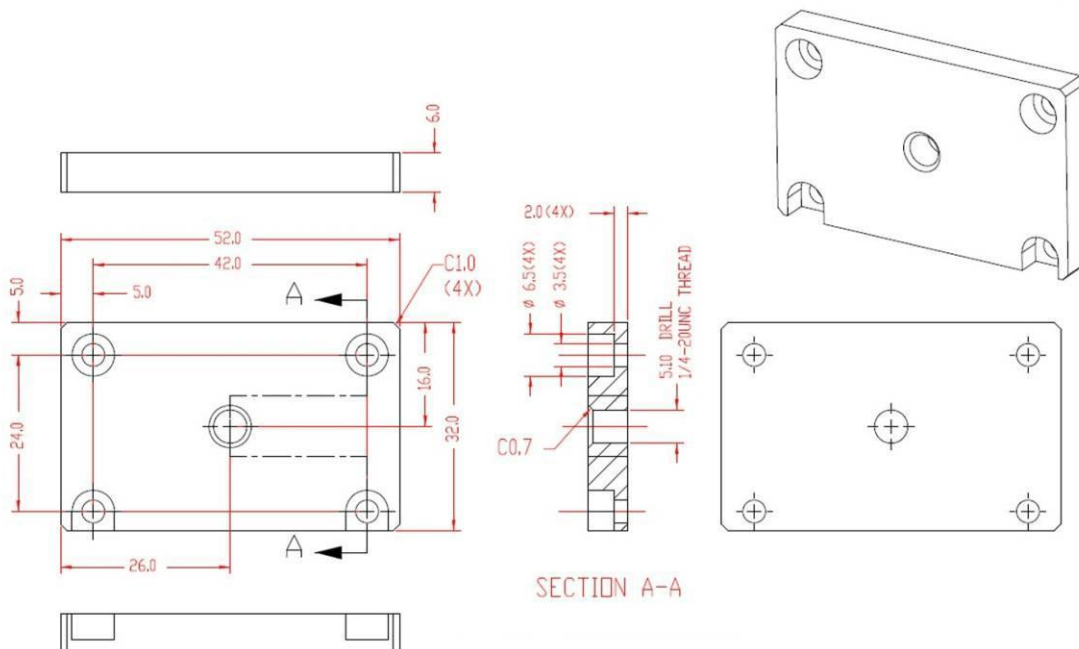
a – Big Bobcat mounting plate using 1/4 in 20 thread.
